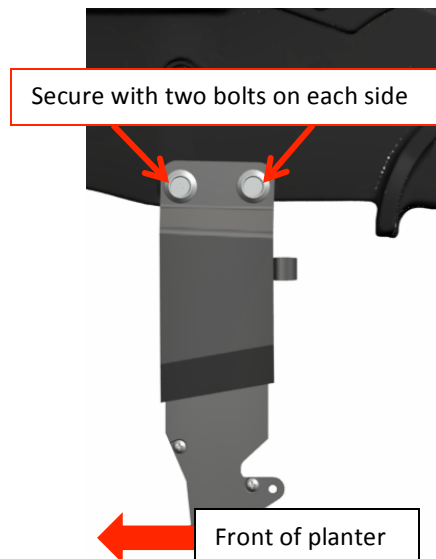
Quick Attach Bracket Installed on Row Unit
